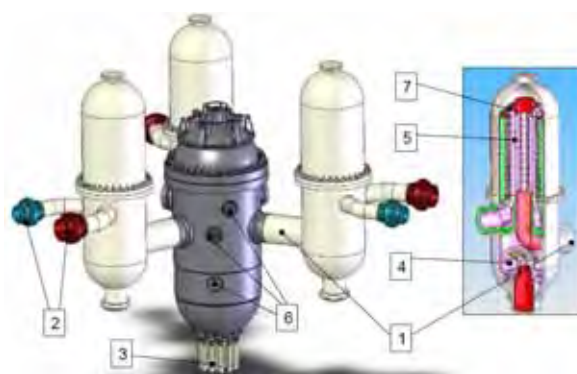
GFR reactor pressure vessel and IHX vessels (and exploded view of one IHX – blower unit)
